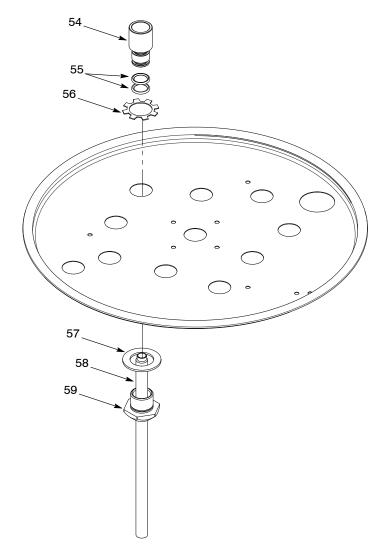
Pump Mount and Pickup Tube Kit for Encore Powder Feed Pumps
